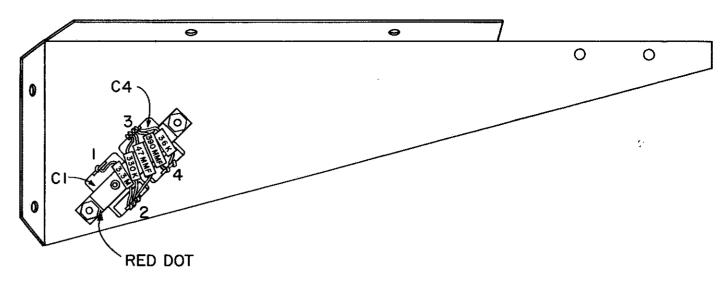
The Vertical Attenuator assembly mounted on the left bracket.
